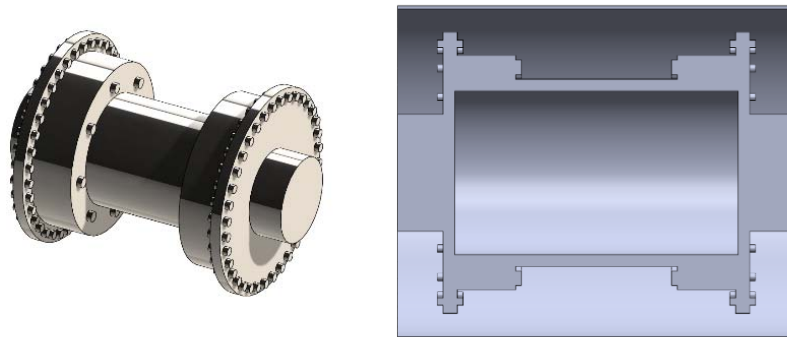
Coupling Geometry and Cross Section View with Coupling Guard
